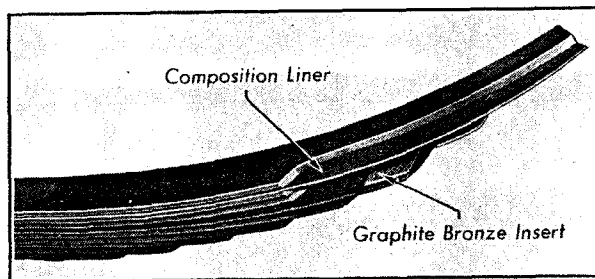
Cutaway view of rear spring, showing composition liner and graphite bronze inserts, which provide adequate lubrication
